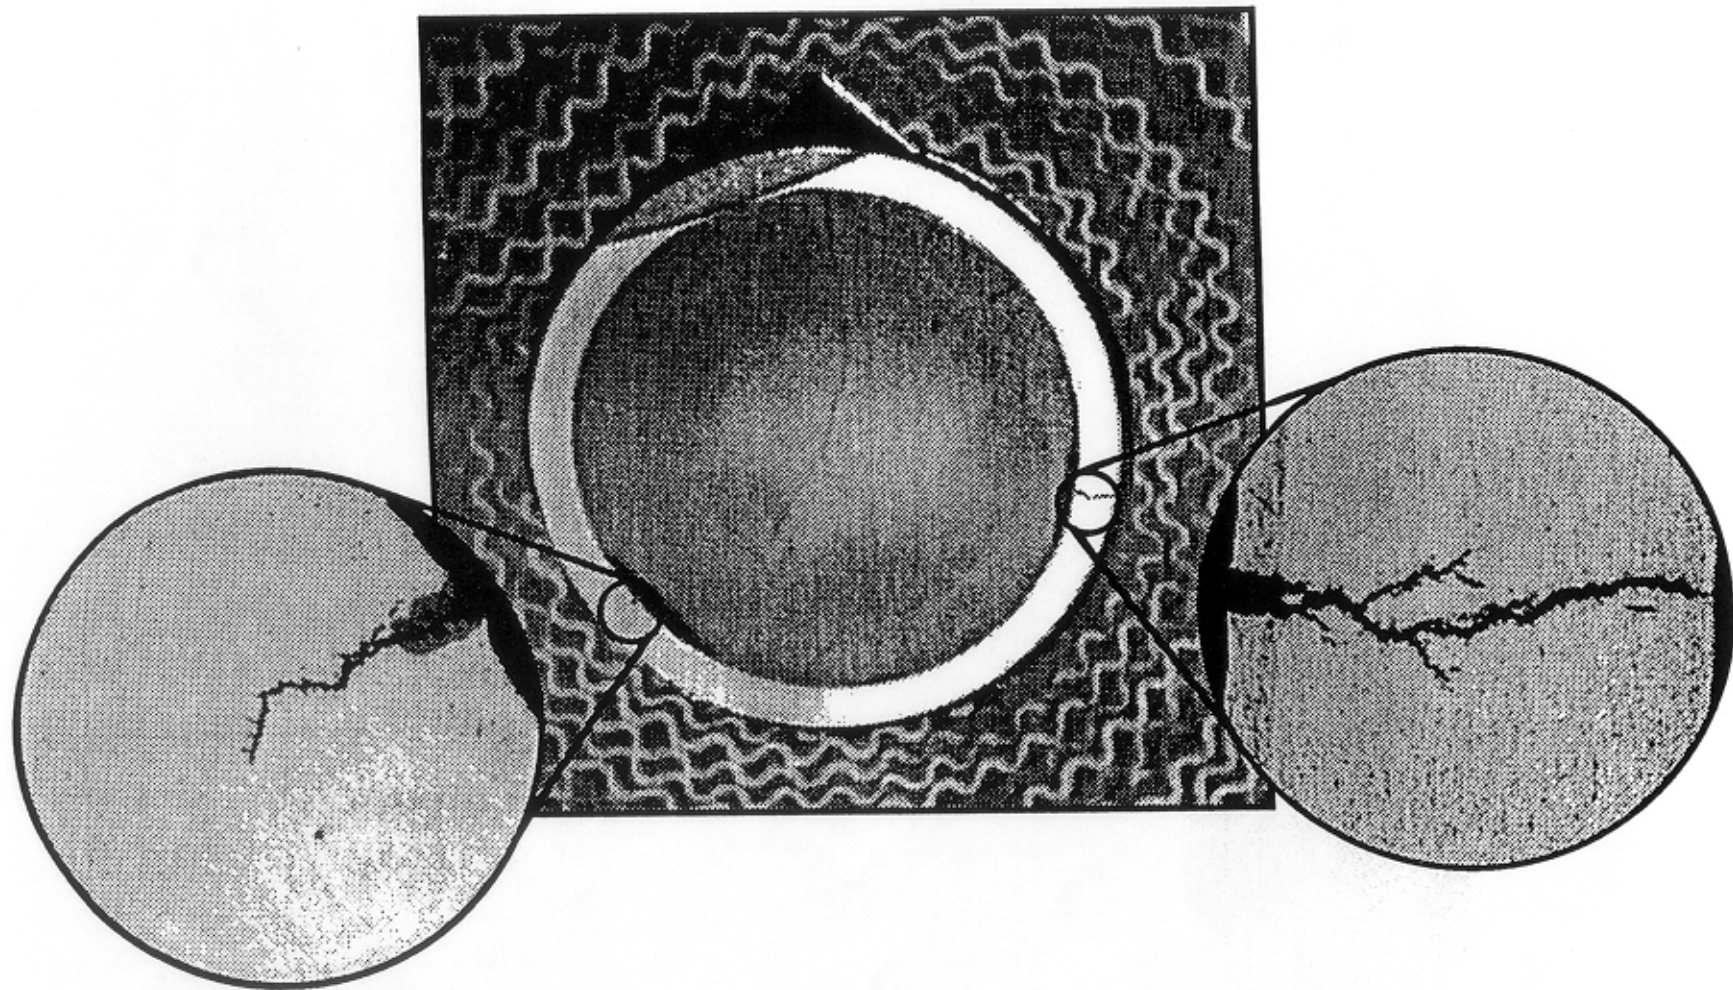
Rod D1 at EC Flaw Location Showing Cracks in Cladding Arcs Subtended by Missing Fuel Surface
